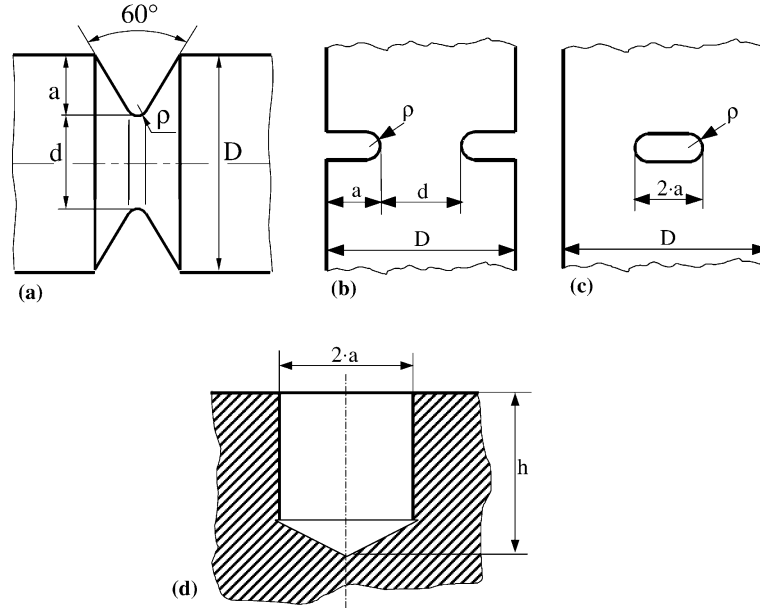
Geometry of specimens weakened by notches and defects: (a) V-shaped notch in a cylindrical bar (CNB), (b) double lateral notch in a flat plate (DENP), (c) hole in a flat plate (CNP), (d) drilled hole in a cylindrical bar (DHB).
